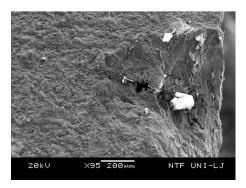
The fracture initiation surface of a coil spring, covered with corrosion products and secondary cracks.
